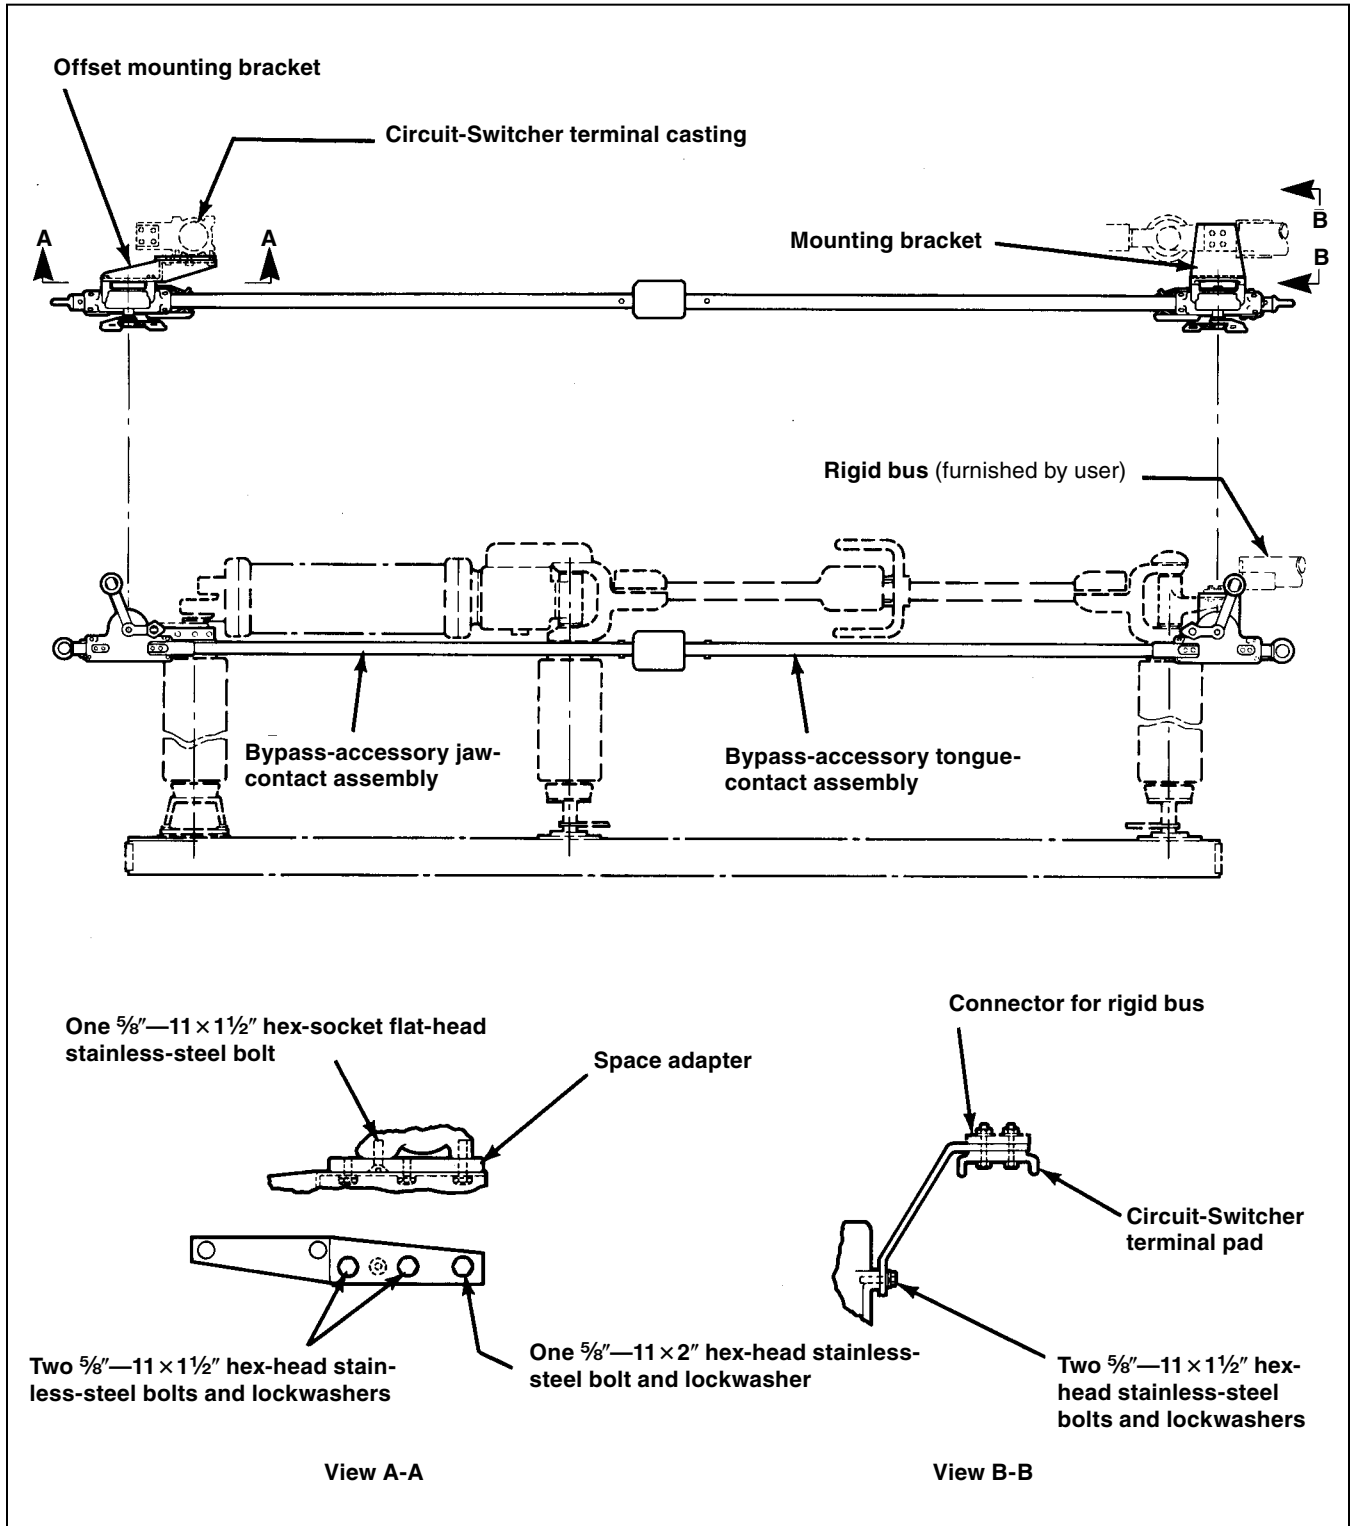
Detail of 1200-ampere bypass accessory attached to a Center-Break Style Circuit-Switcher.
